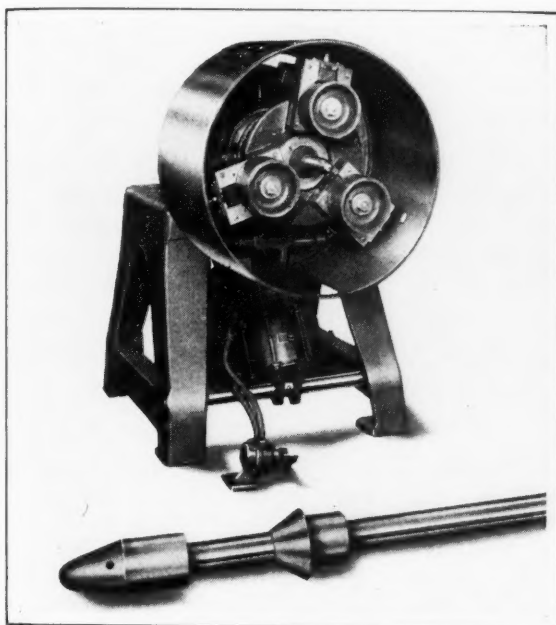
Machine for Rolling Down the Weld and Safe End of Boiler Flues and Tubes
